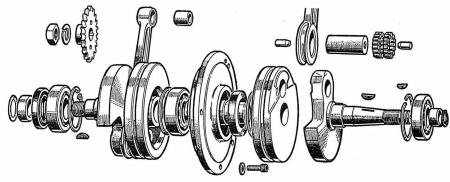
Exploded view of 2T and 3T crankshaft and associated parts.
